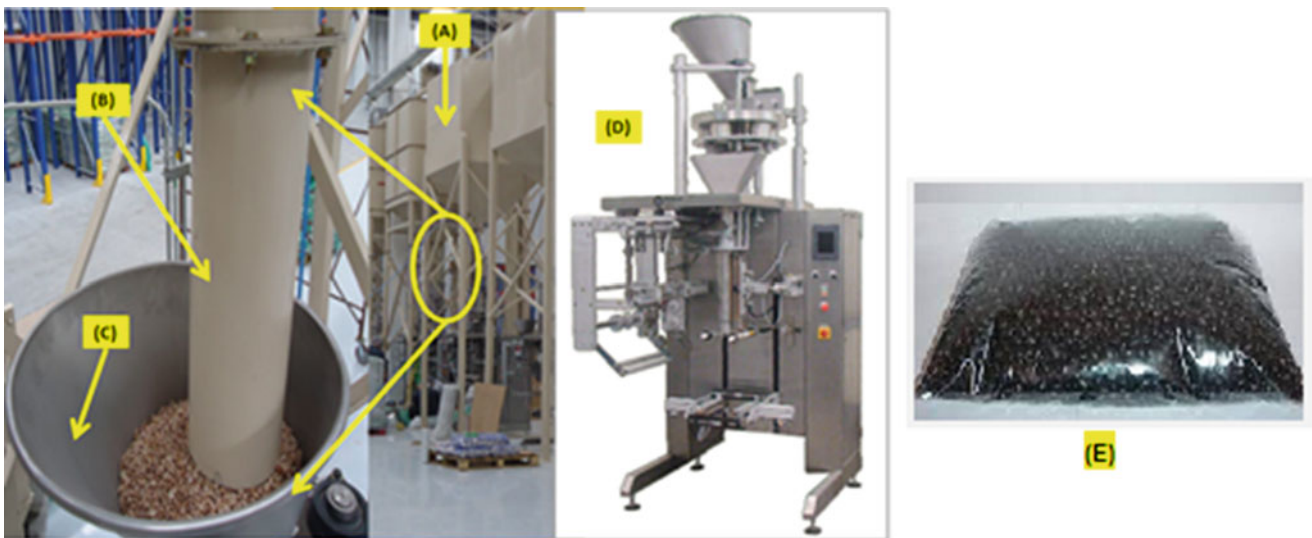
(A) Hopper, (B) Outlet Tube, (C) Cone, (D) Bagging Machine, (E) Bag
